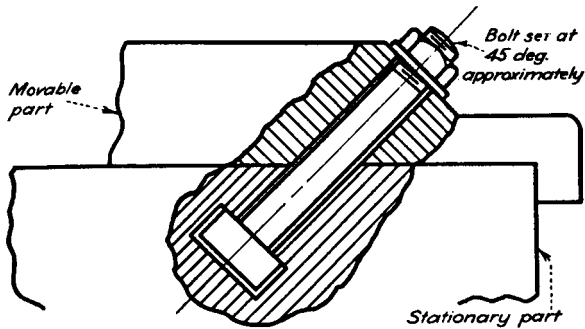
When a nut is tightened, the flange on the edge of the movable part is drawn against the machined edge of the stationary part. This method is effective, but the removal of the clamped part can be difficult if it is heavy or unbalanced.
